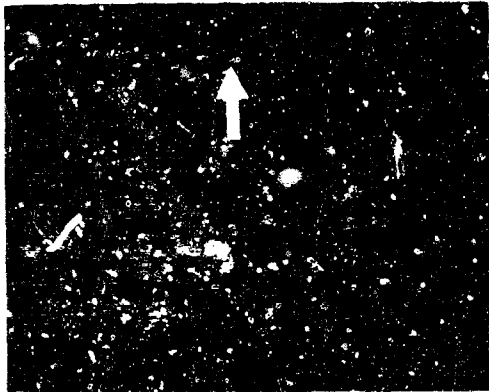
Fractograph Showing a Mixed Quasi-Cleavage and Dimpled Rupture Fracture Mechanism
